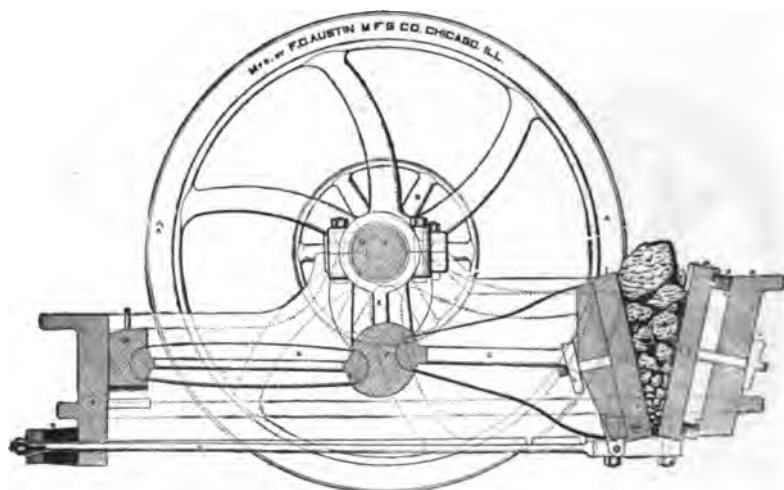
THE AUSTIN CRUSHER. SECTIONAL VIEW.
